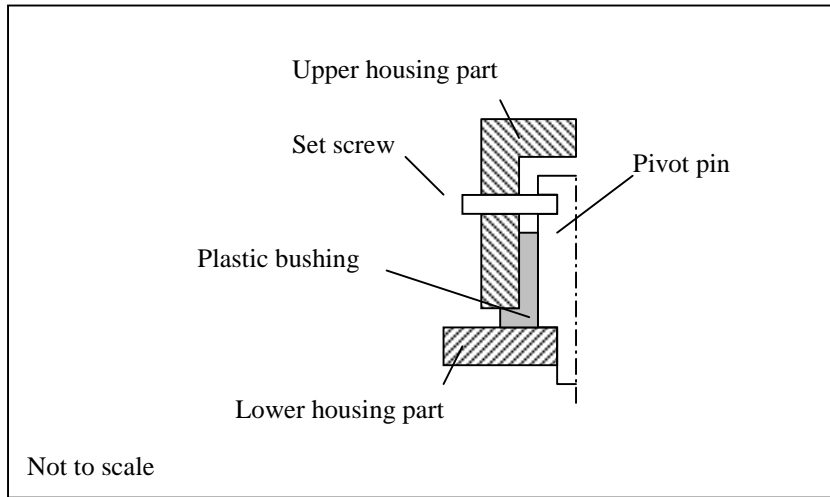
Schematic of the furl bearing. The upper housing part furls with respect to the lower housing part.
